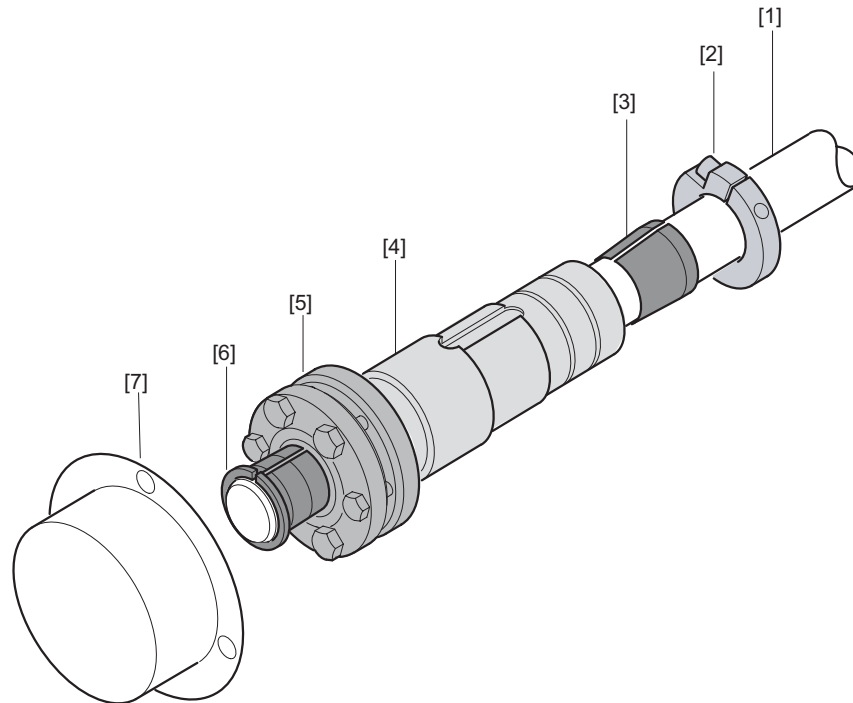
Components of the TorqLOC® hollow shaft mounting system
